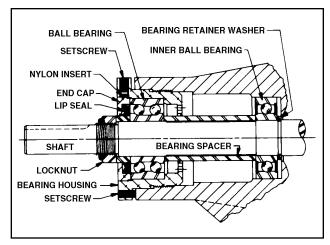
Thrust-Bearing assembly (AS, AK, AL)
